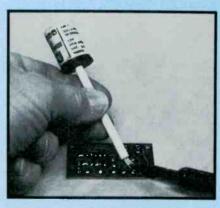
This wick dispenser tool contains copper braided wire that can soak up solder from circuit boards.
